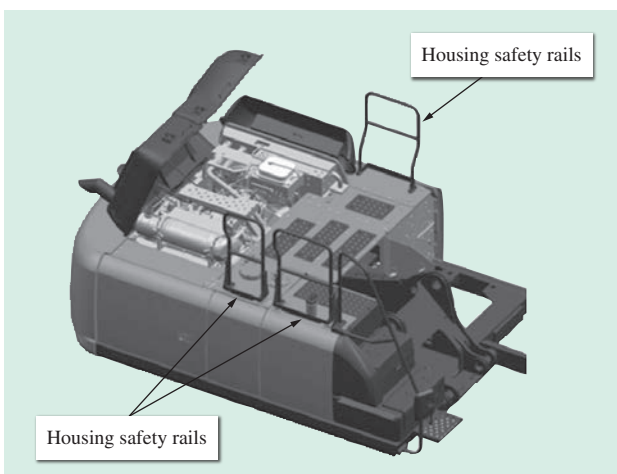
ZAXIS 240-6 Housing Safety Rails and Engine Cover Structure.
